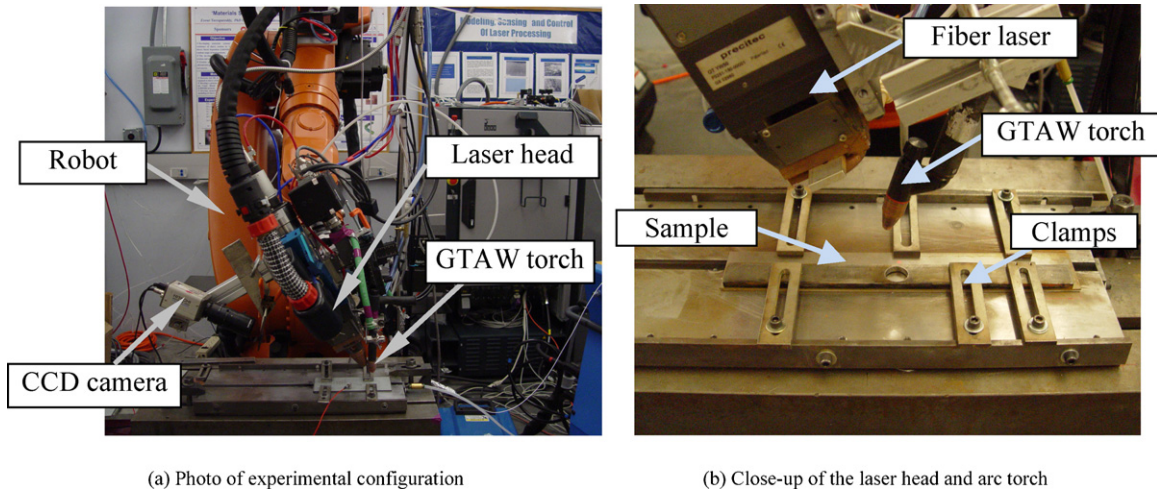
Experimental setup of laser-arc hybrid welding system. (a) Photo of experimental configuration; (b) Close-up of the laser head and arc torch.
